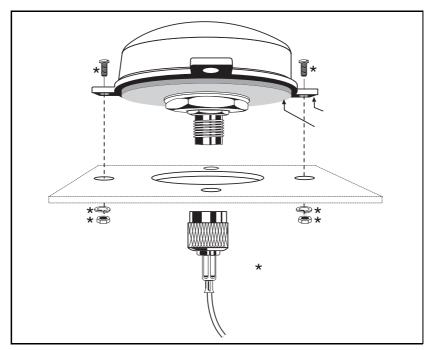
Mounting the miniature bulkhead mount GPS antenna with flange (PN 31192-00)
